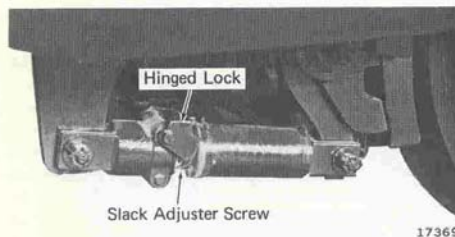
Screw Type Brake Shoe Slack Adjustment
